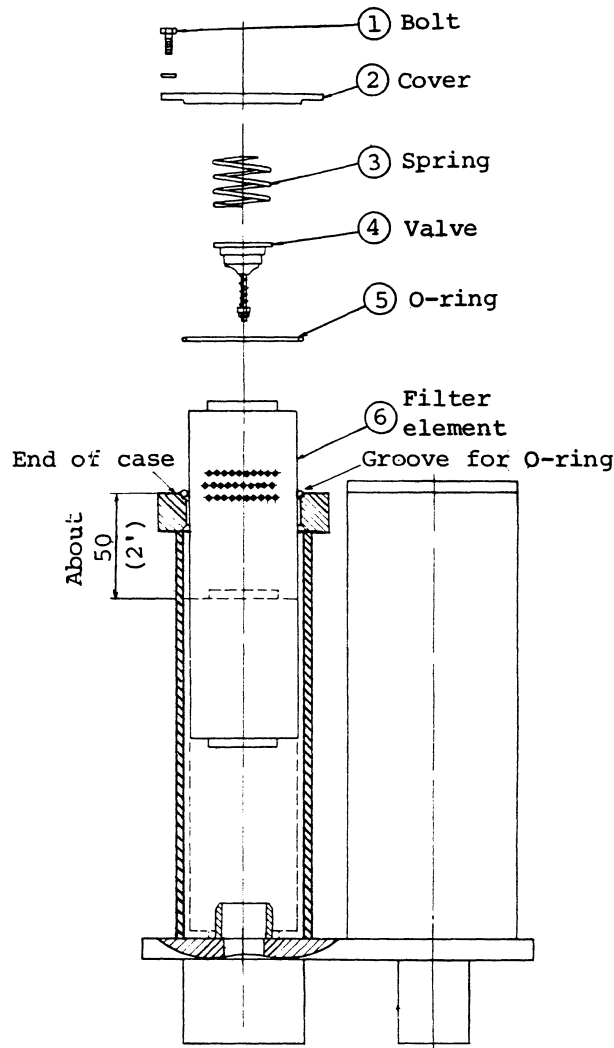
Disassembly and Assembly of Full-flow Filter
